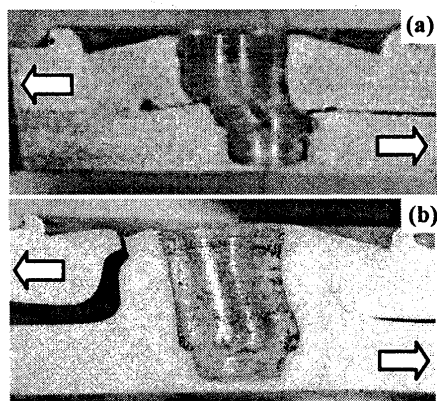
Fracture modes observed at cross section of a partially loaded weld under tensile shear loading: (a) shear fracture, (b) tensile/shear mixed fracture. The arrows indicate the loading direction.
